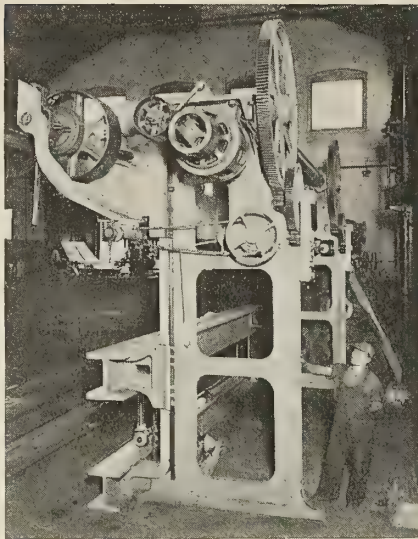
End View of Gang Drill Showing Driving Mechanism
